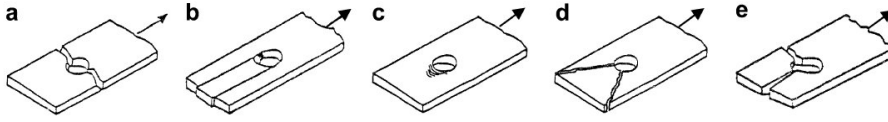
Failure modes for bolted joints: (a) Net-tension, (b) Shear-out, (c) Bearing, (d) Tear-out, (e) Cleavage.
